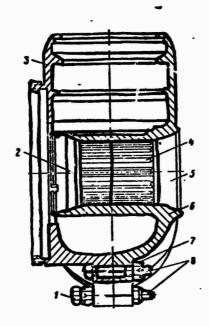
Split three-bladed propeller hub: 1 - balance nut; 2,5 - conical seats for front and rear cones; 3,6 - front and aft hub sections; 4 - splines; 7 - nut; 8 - through-bolts.
